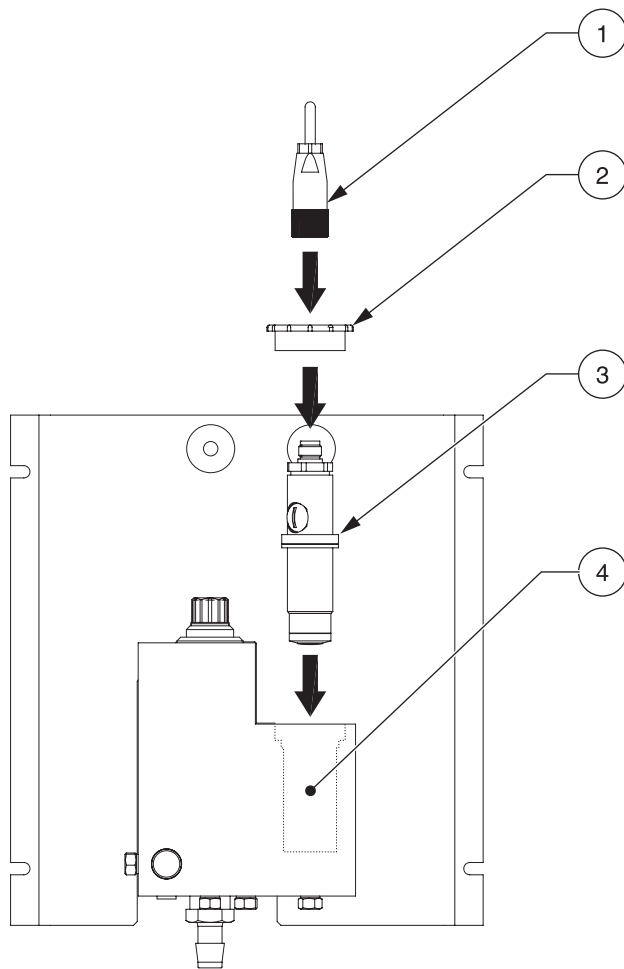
Placing the Probe Into the Flow Thru Assembly¹
